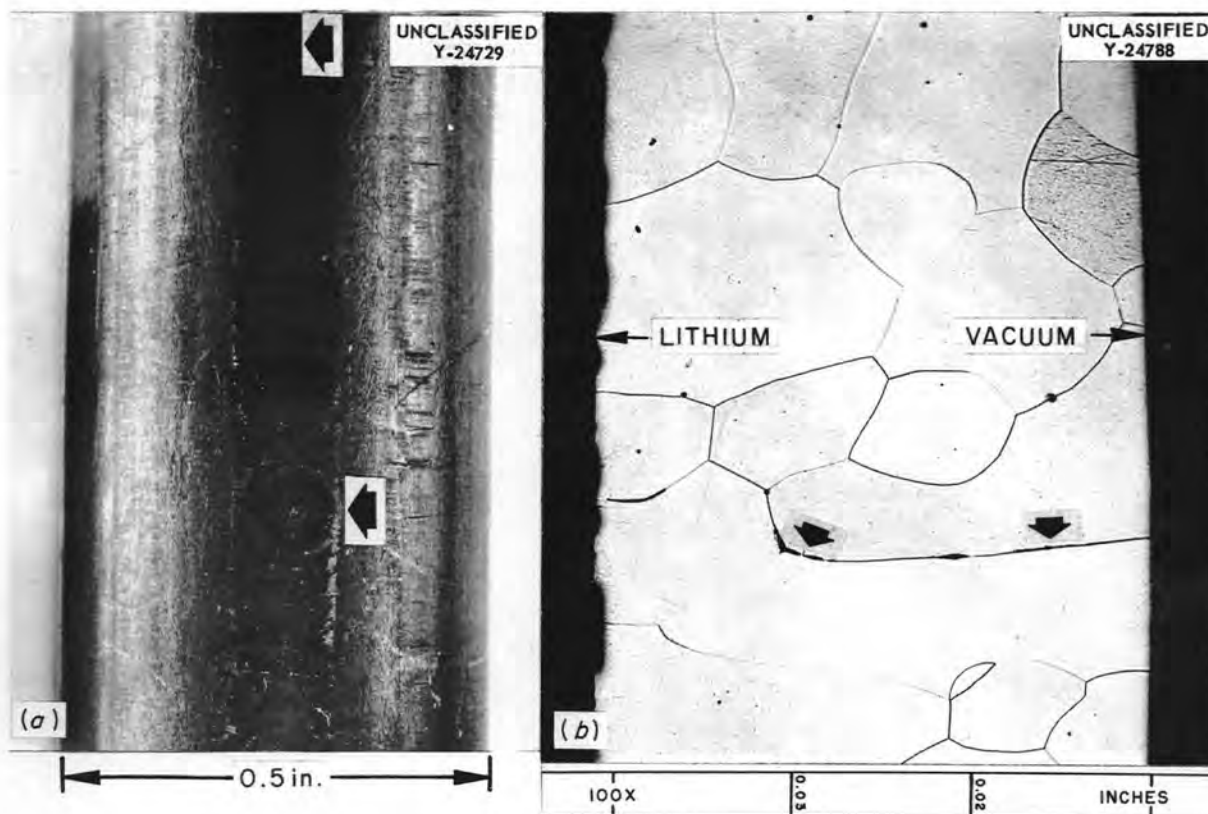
Section of Sintered Columbium Tubing from Hot Leg of Loop No. 58 (See Fig. 1.2.18 for Over-All View). (a) Columbium tube showing location of lithium penetration through longitudinal weld. (b) Metallographic section of tube wall weld zone showing penetration along grain boundary. Etchant:  $\text{HF-H}_2\text{SO}_4\text{-HNO}_3\text{-H}_2\text{O}$ . Reduced 6%. (Secret with caption)
